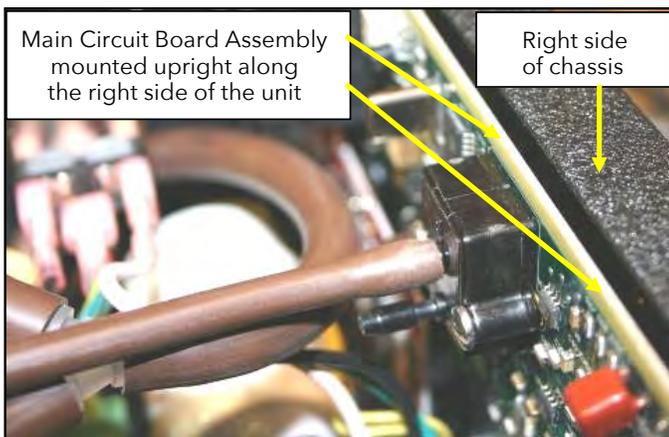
MAIN CIRCUIT BOARD ASSEMBLY INSTALLED.
